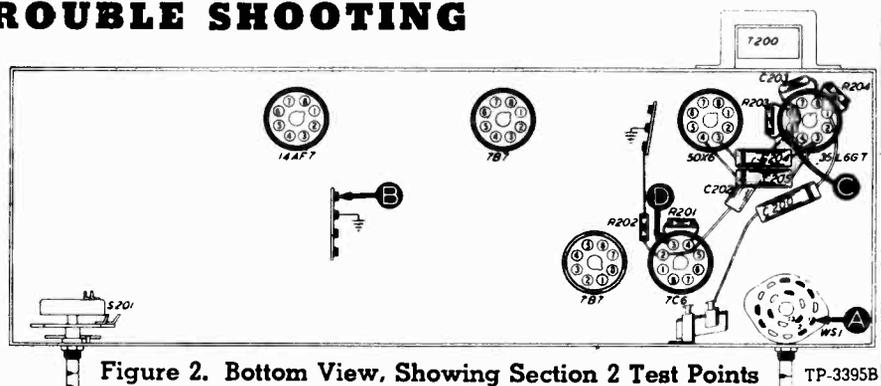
Bottom View, Showing Section 2 Test Points TP-3395B
